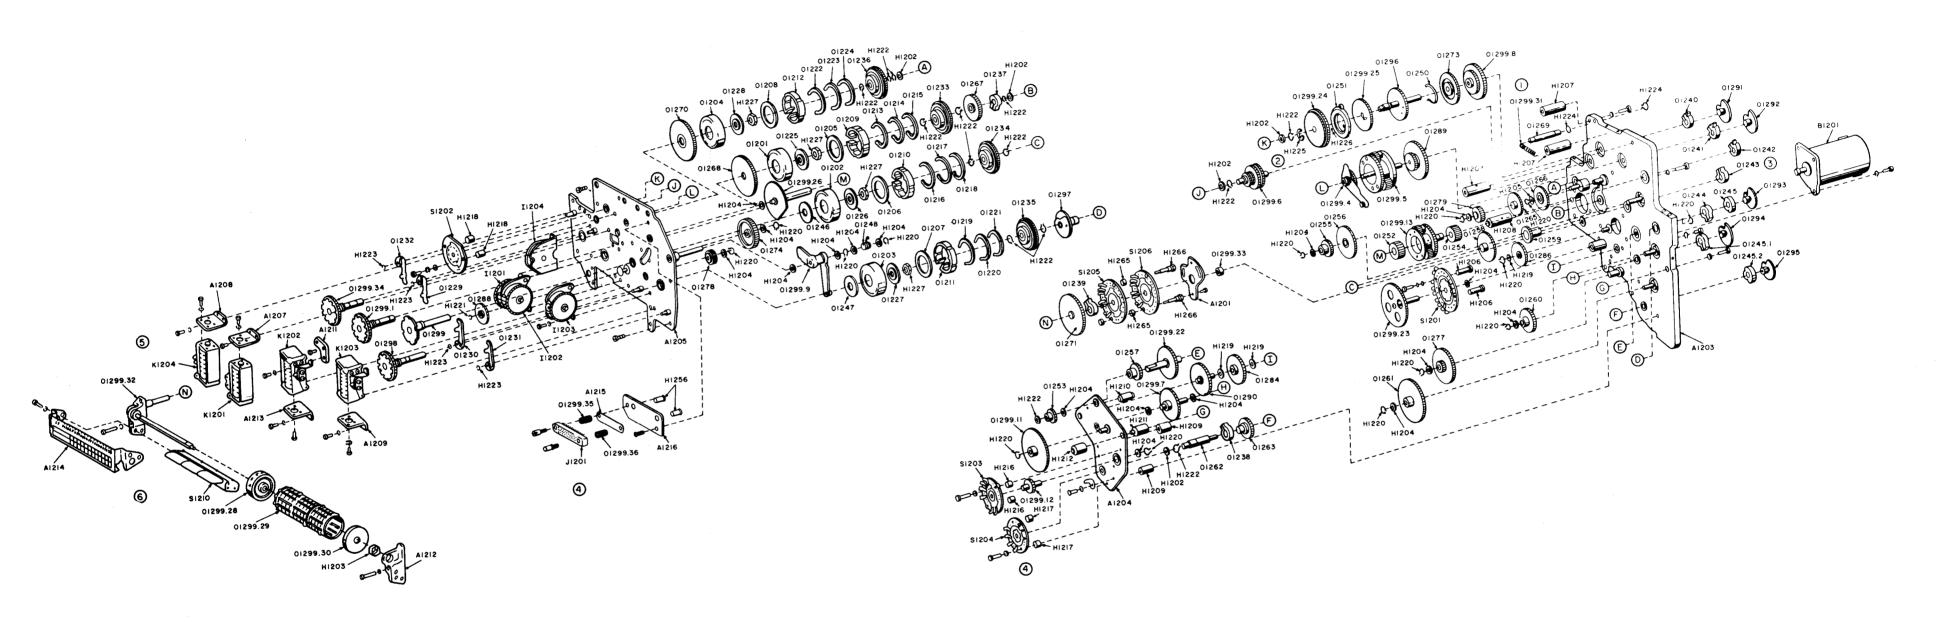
Frequency Selector, Exploded View (AN/URC-9, -9Y, -9AY)
